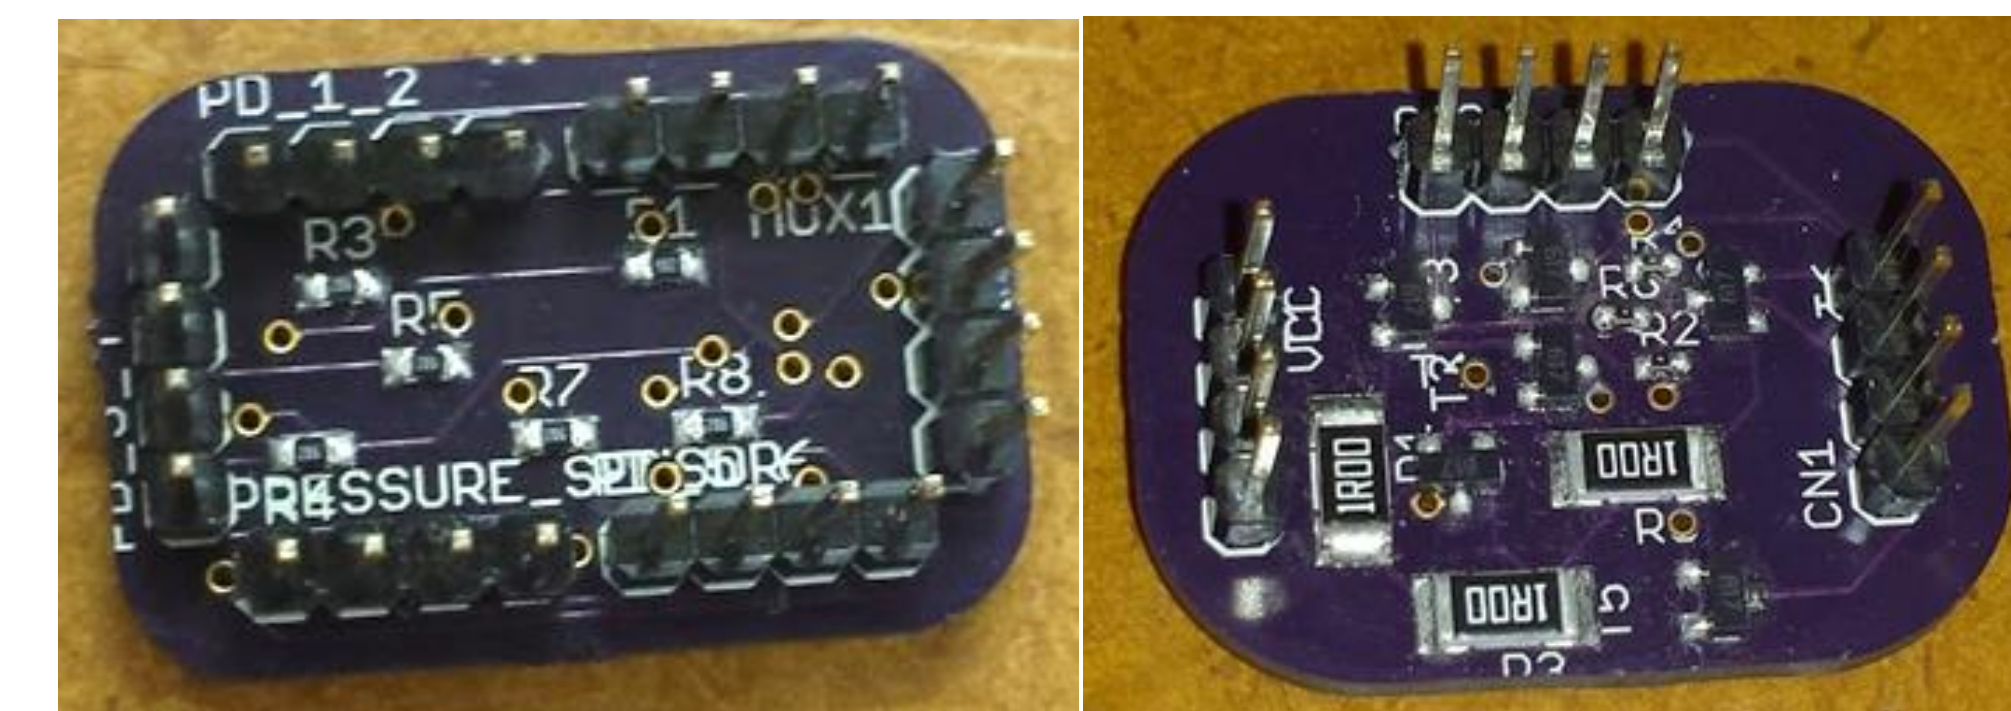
Photodiode PCB Fig. 6. LED Driver PCB
